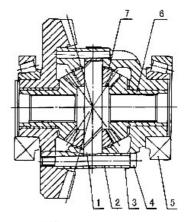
diffirencial gear assembly 1. satellite gear shaft 2. diffirencial gear cover 3. washer 4. bolt 5. bearing 30212 6. half-axle gear 7. satellite gear
